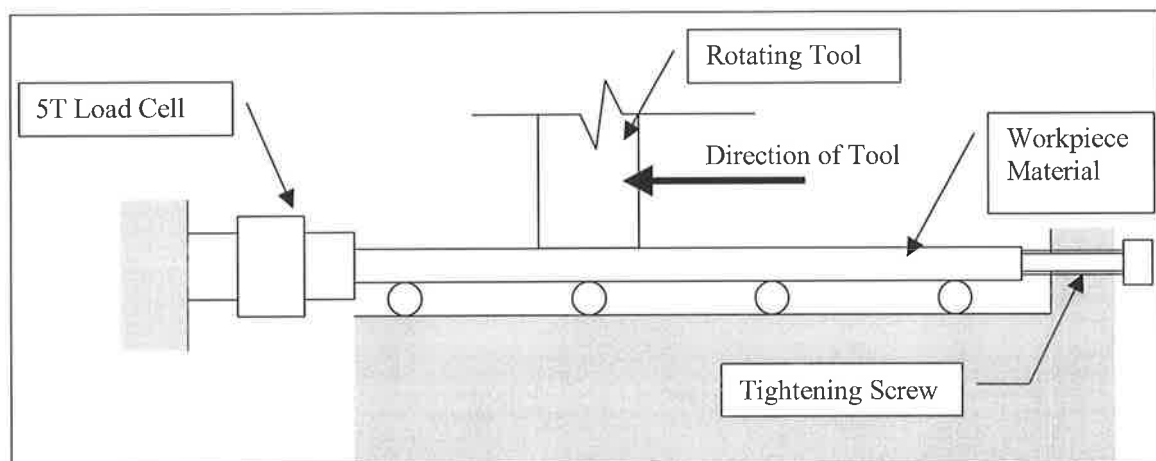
Load measurement as performed for 12.5mm thick 5083 and 7075 aluminium alloys
